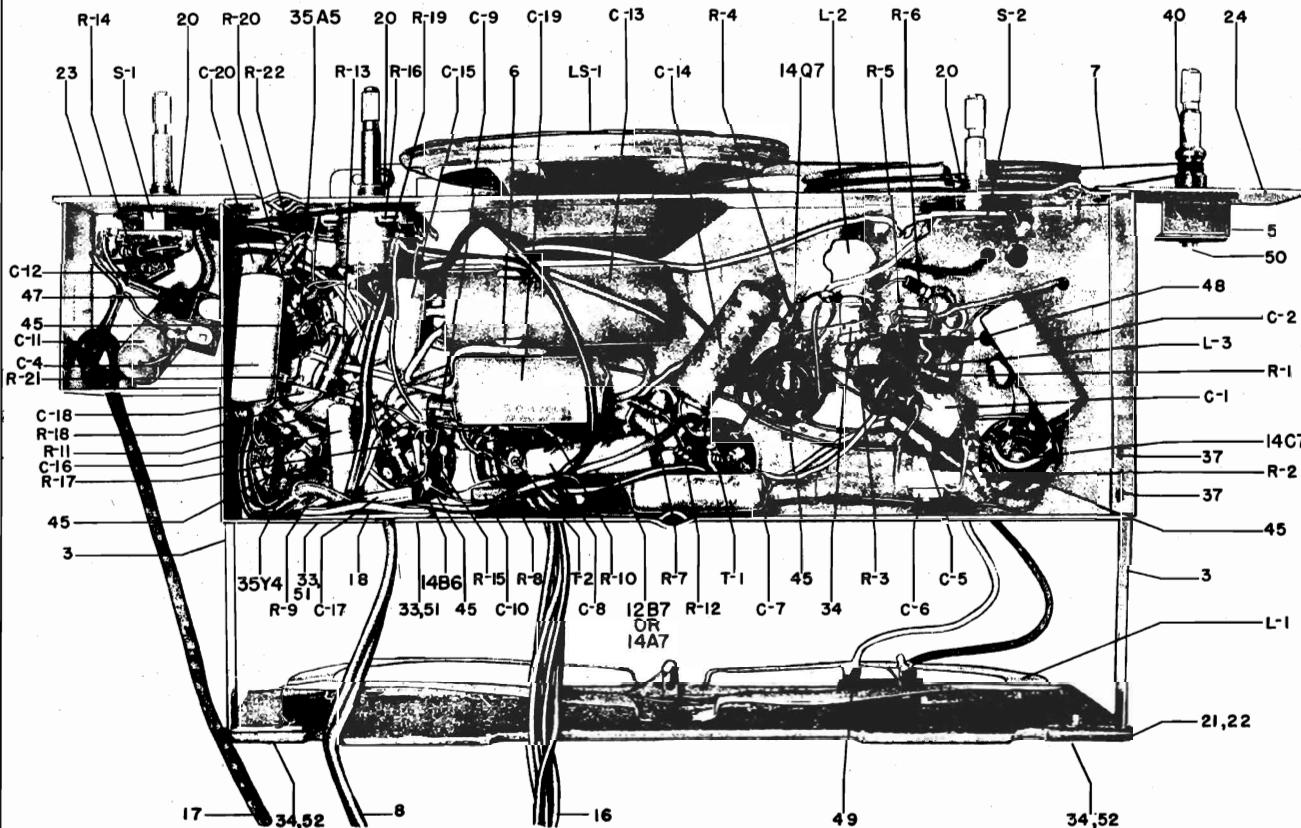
CHASSIS HS-122 PARTS LOCATIONS - BOTTOM VIEW
